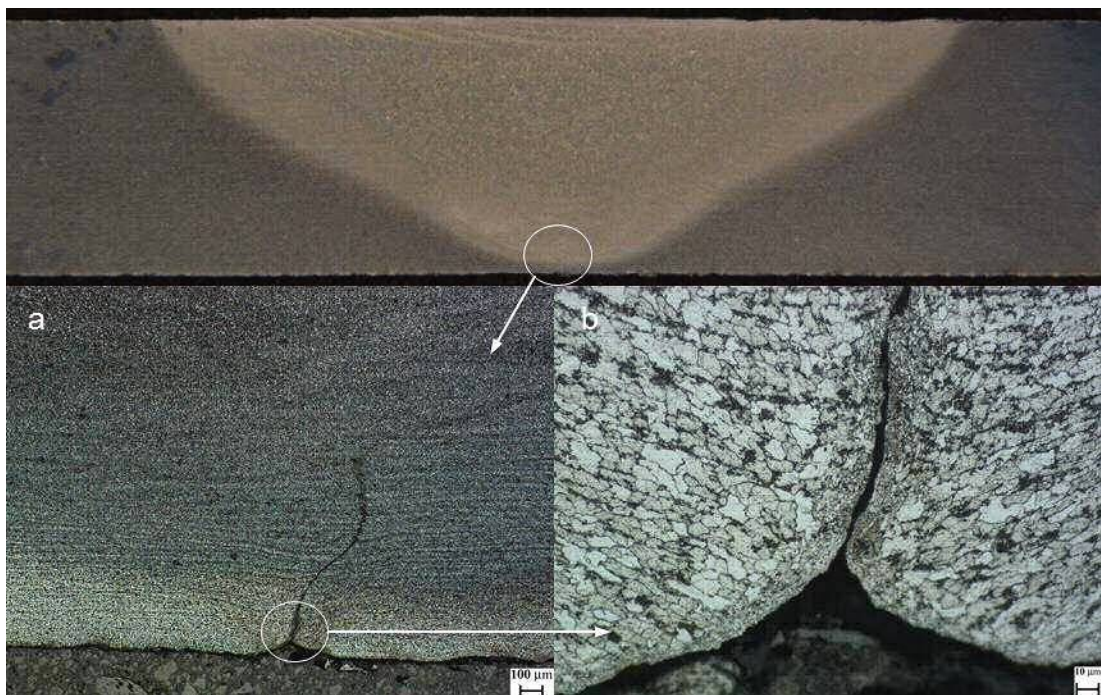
Weld root flaw in W09 (a) [x50, Etched]; (b) [x500, Etched]
